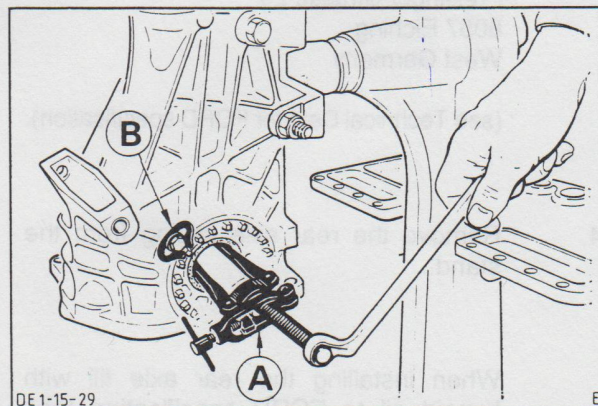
Tighten differential bearing housing 4 or 5 teeth.
